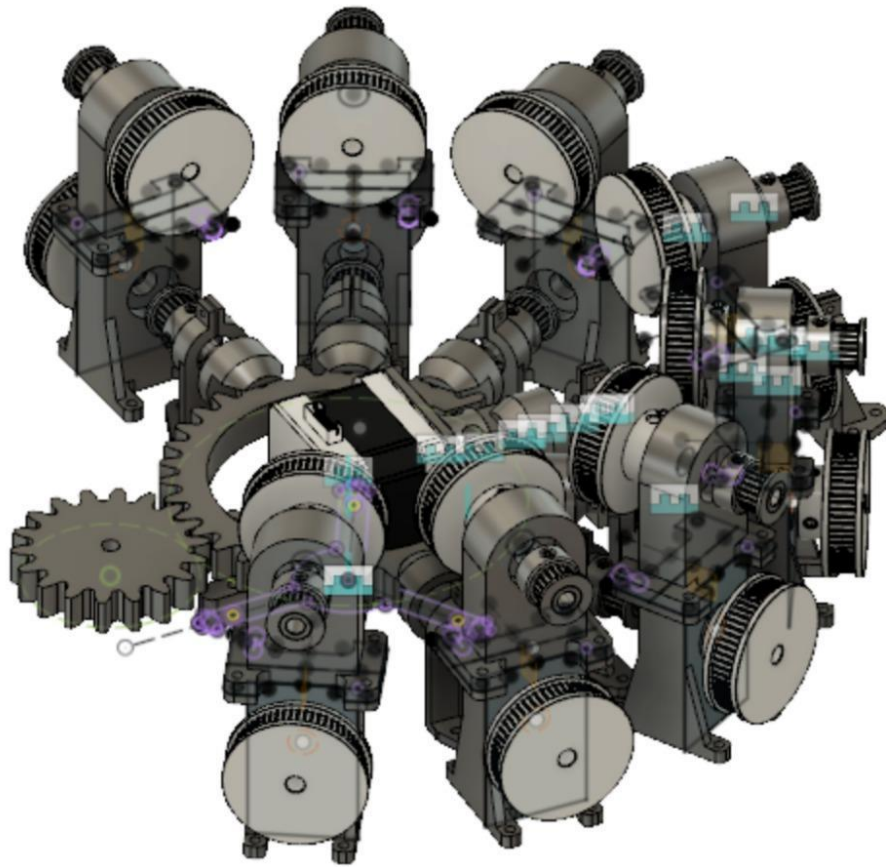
Left Side view of CAD model of revised mechanical multiplexer
